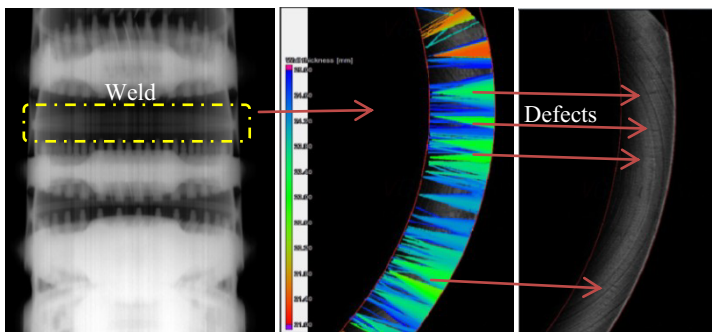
a - Radiography, b - The definition of the weld thickness, c – Defects in weld joint.
